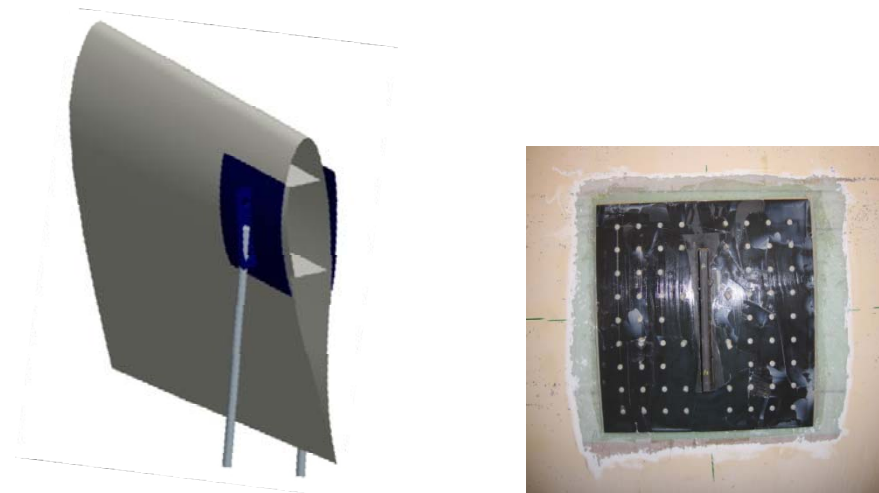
Load introduction used in edgewise test. The loads are transferred to blade using a bonded steel fitting.
